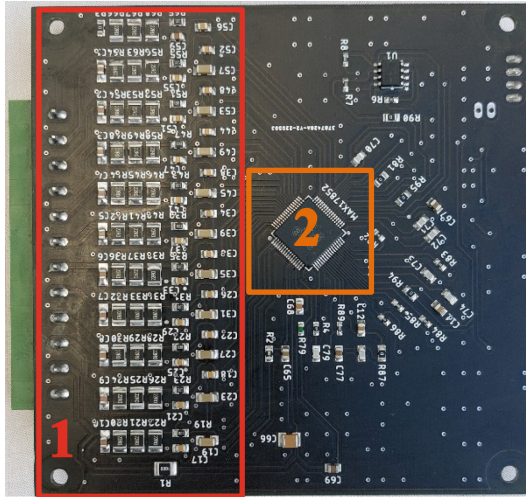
Bottom Layer PCB: 1-Battery Pack Interface, 2-Max17852IC.
